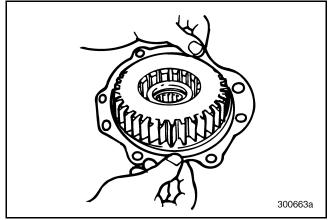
Installing Main Drive Pinion Bearing Cover Gasket
